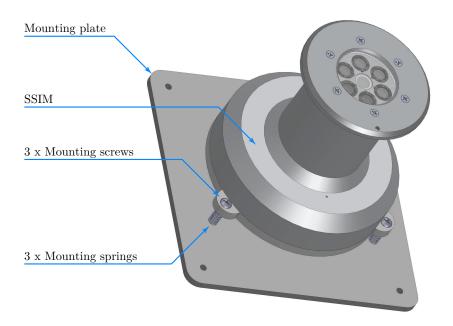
Assembled SolarSIM-D2 on a mounting plate.
